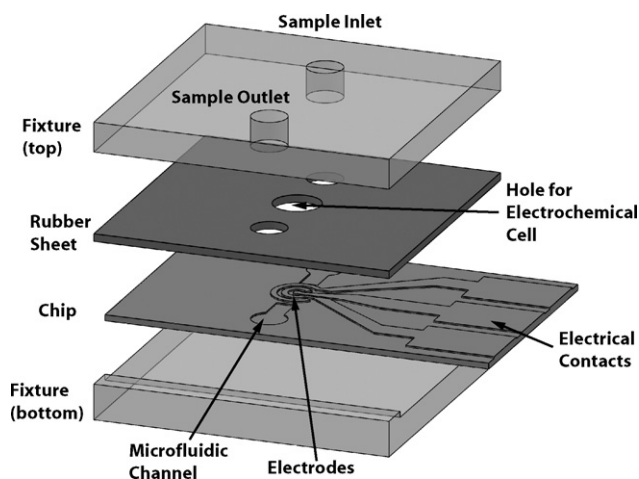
Schematic of a fixture enclosing a sensor chip.
